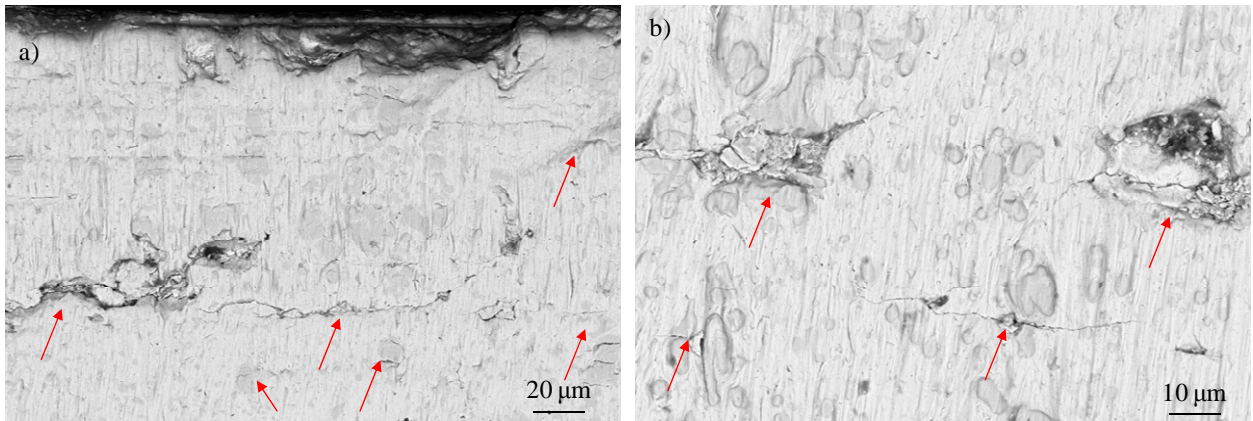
Cracks nucleated at the flank face of a lower 1.2379 tool at 36000 strokes
